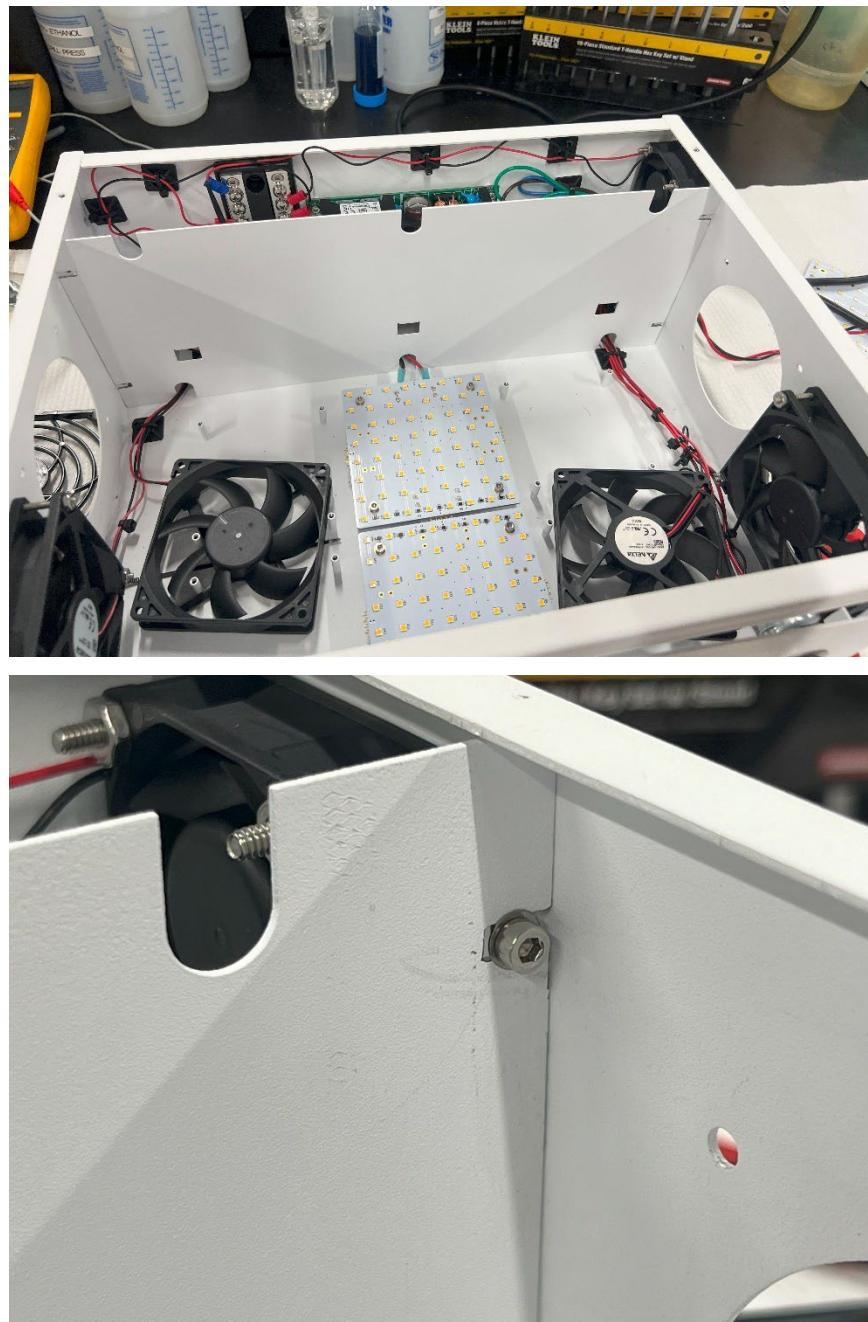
Fully installed bulkhead with wires through the bottom gaps (top). Location of proper mounting with M3 screws (bottom).
